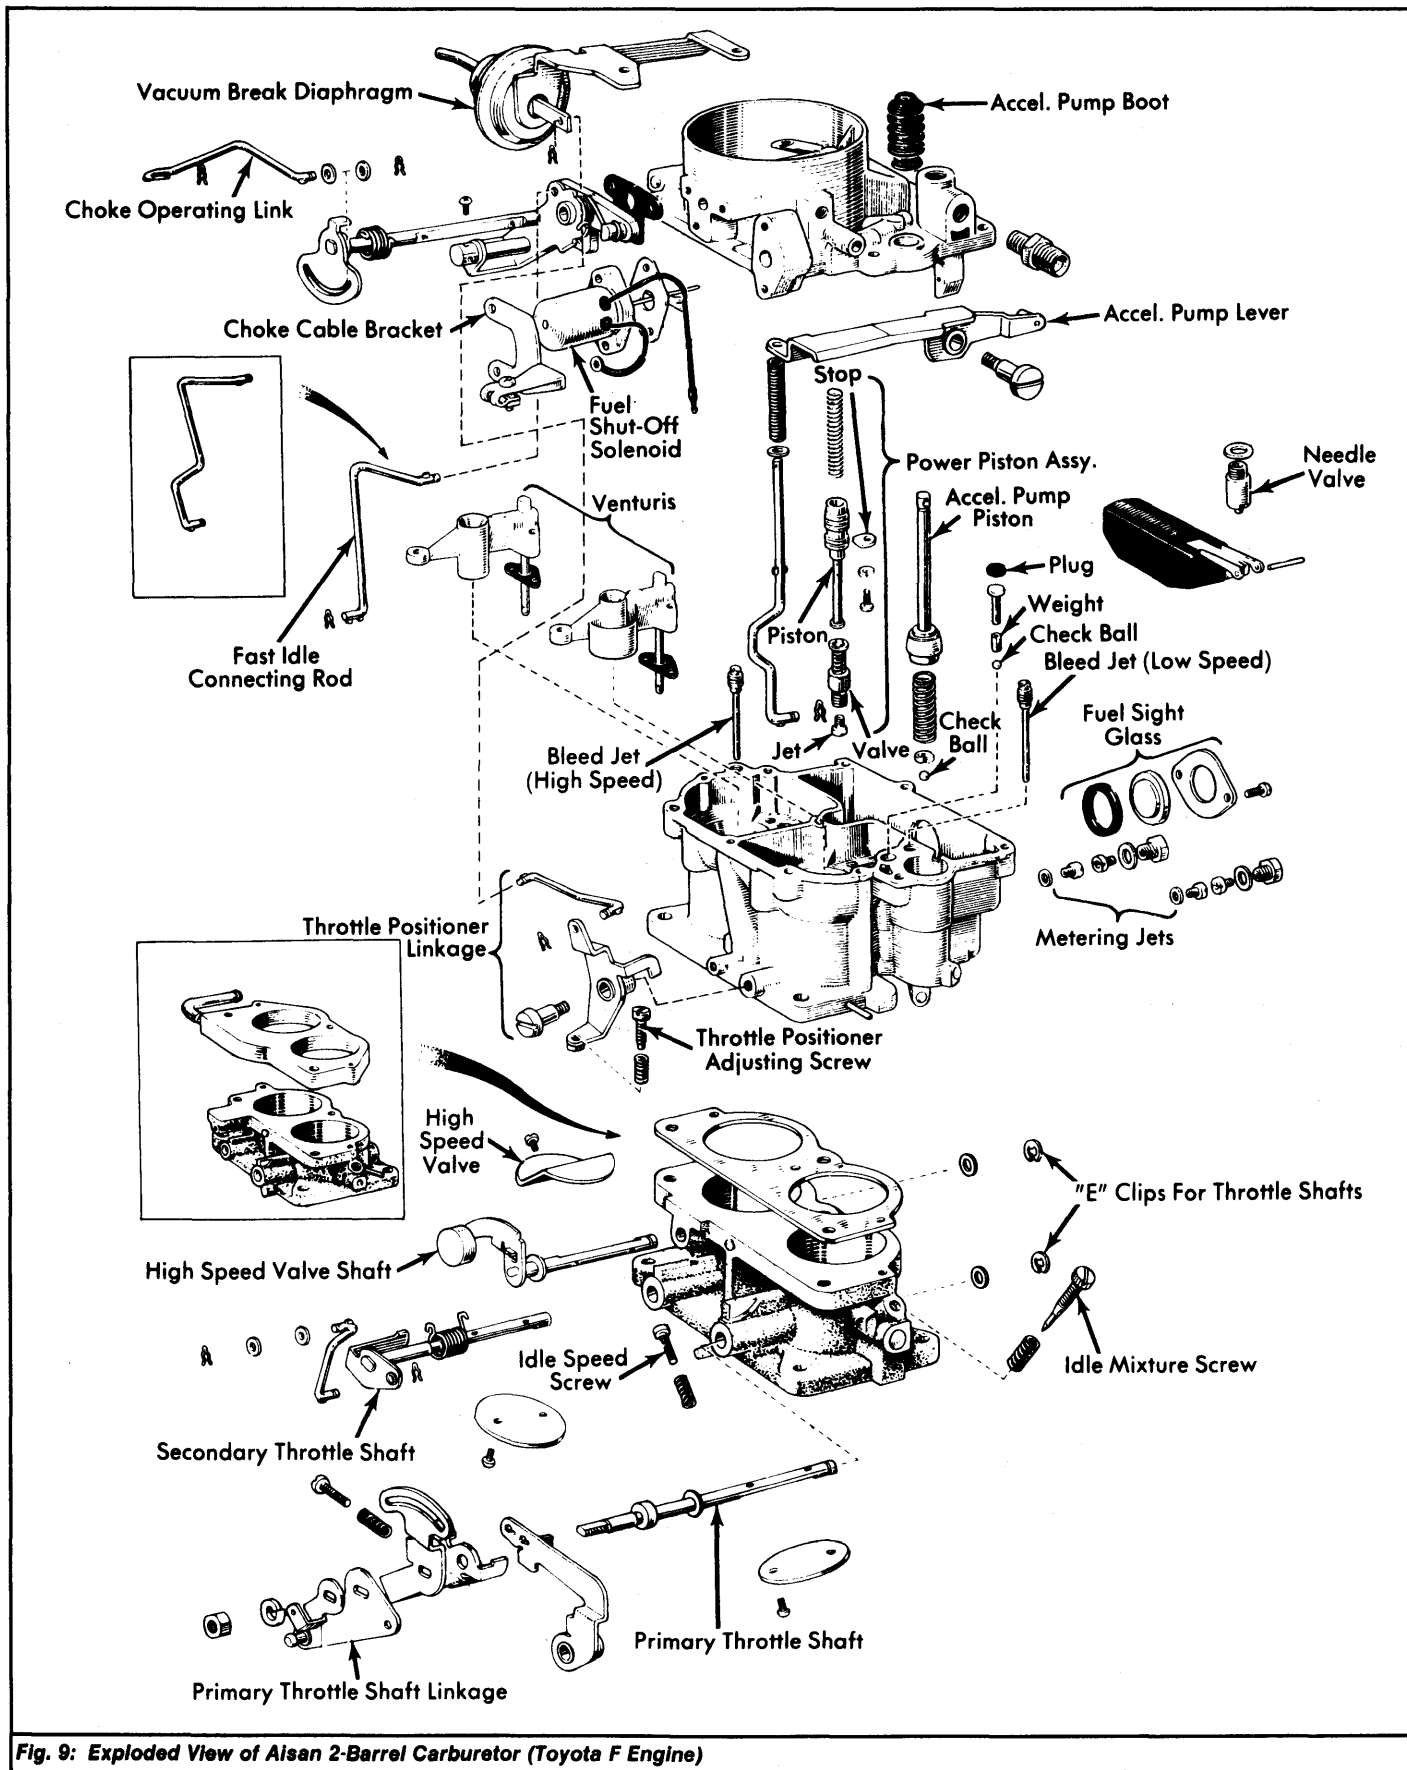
Exploded View of Aisan 2-Barrel Carburetor (Toyota F Engine)
